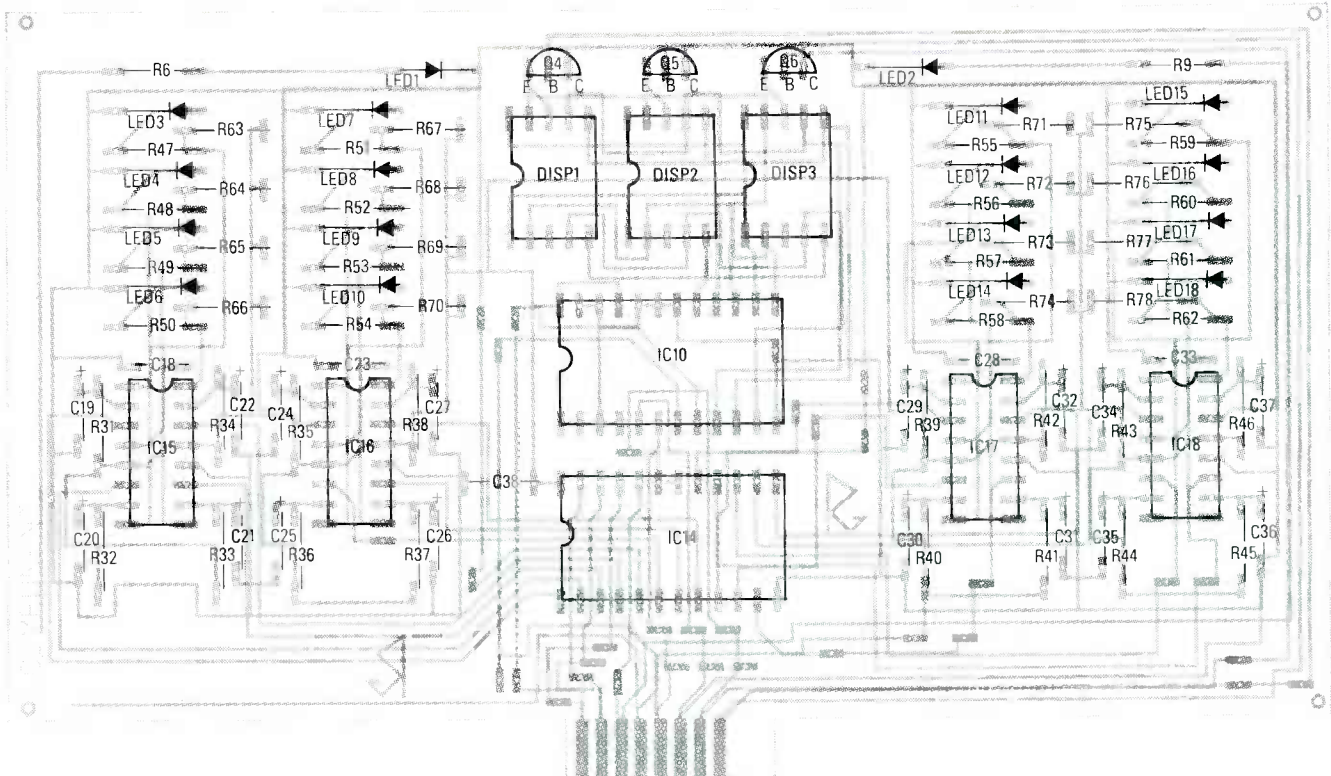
DISPLAY BOARD PARTS PLACEMENT DIAGRAM.
